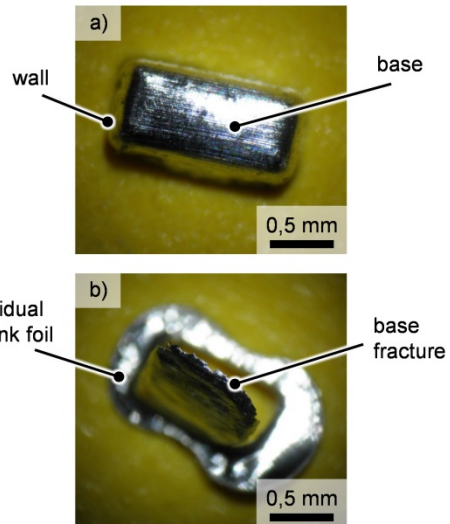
a) Accepted part: rectangular micro cup with no drawing defects, and b) refused part: drawn rectangular micro cup with fracture of cup's base.
